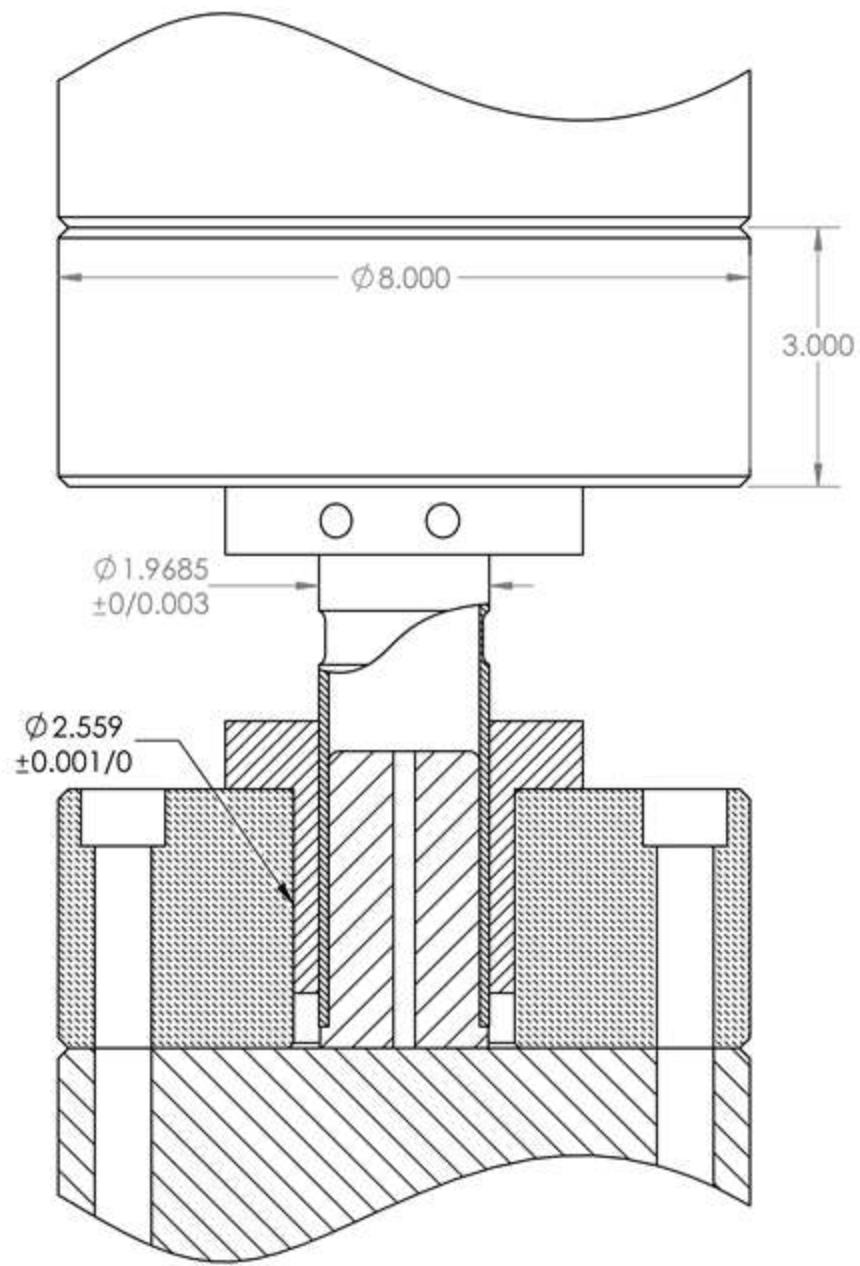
Scaled drawing of the gripping mechanism used to mount the specimen on to the axial-torsional testing machine (dim. in inches — 1 in = 25.4 mm).
